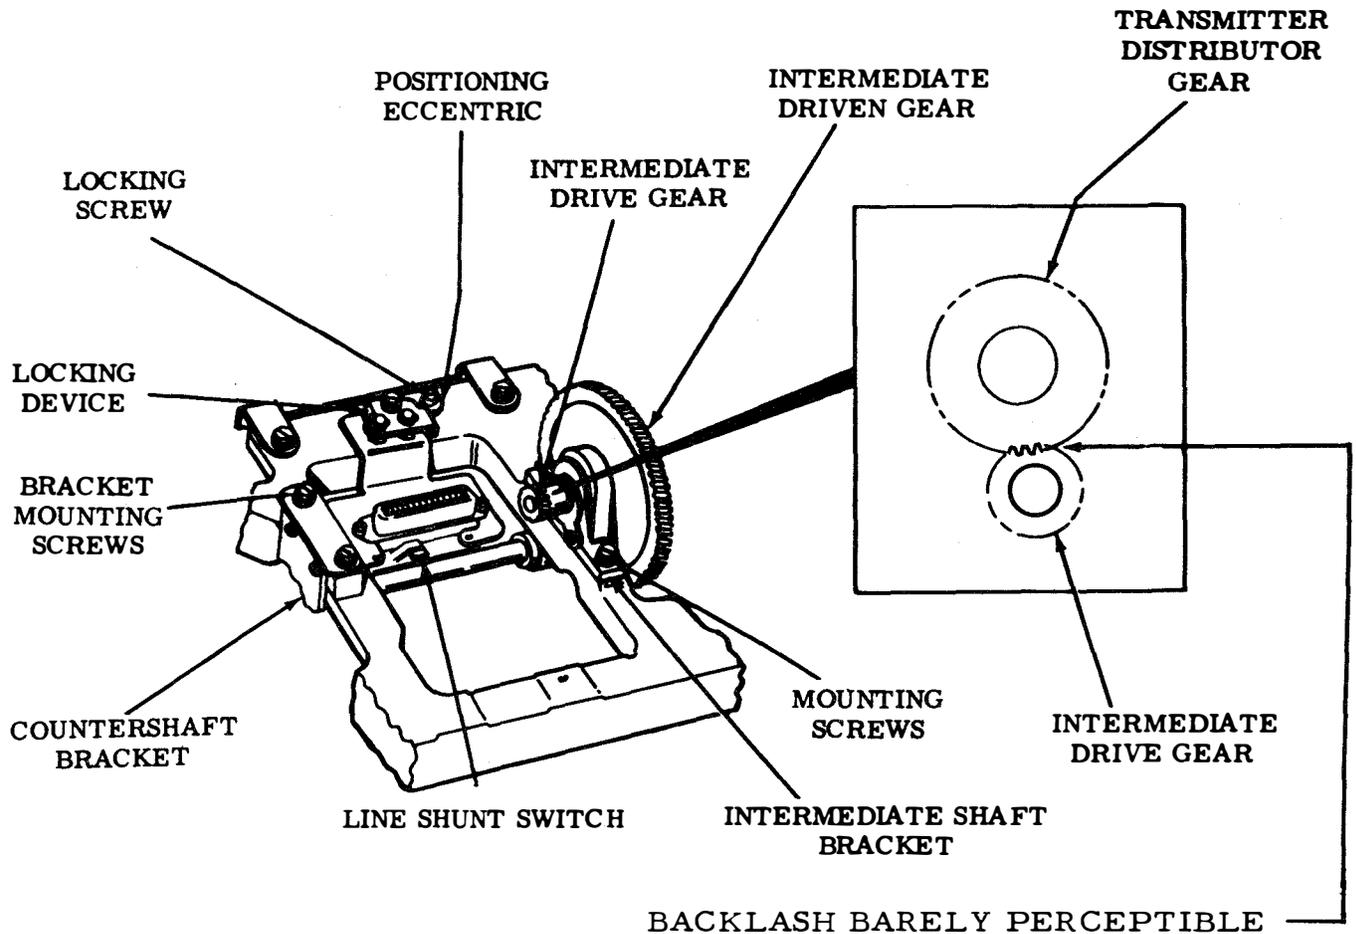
Transmitter Distributor Unit Positioning (Variable Speed)
